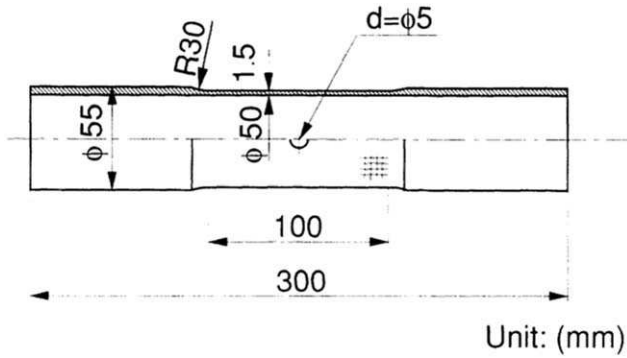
Notched specimen dimension for biaxial fatigue tests [81].
